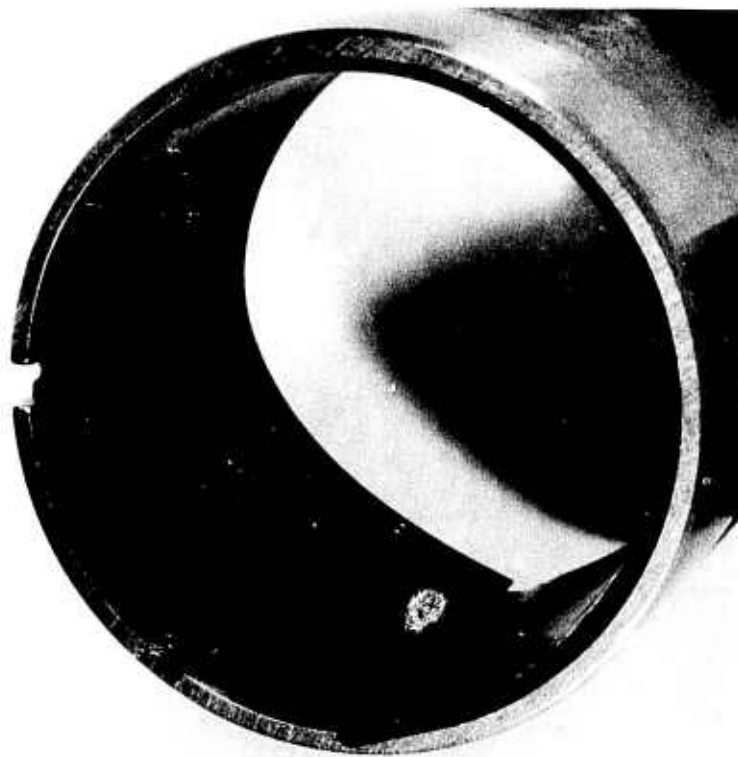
Single Leaf HYDRESIL Foil Bearing
